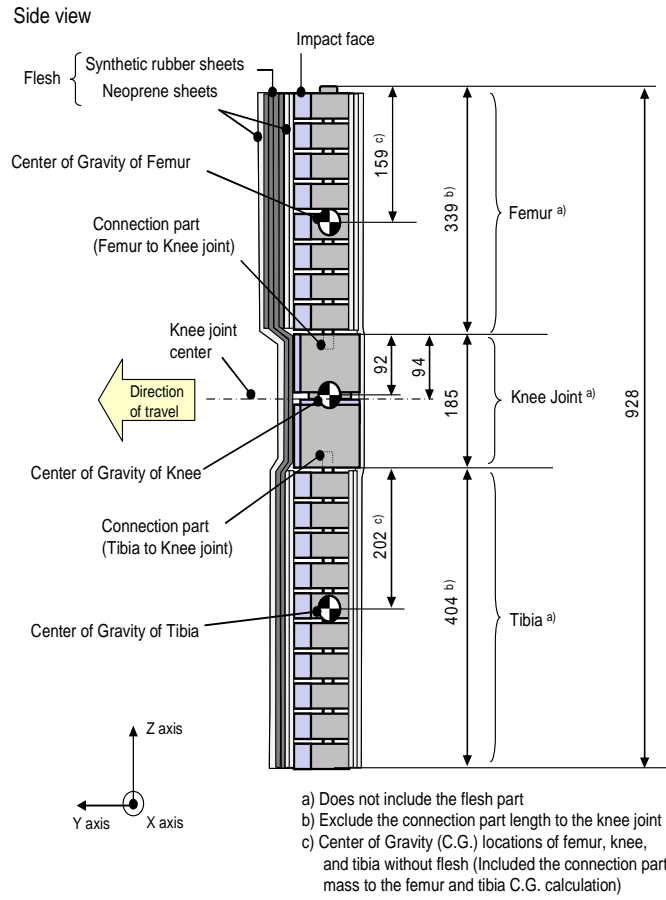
FlexPLI; Dimensions and C.G. locations of femur, knee joint, and tibia (Side view)
